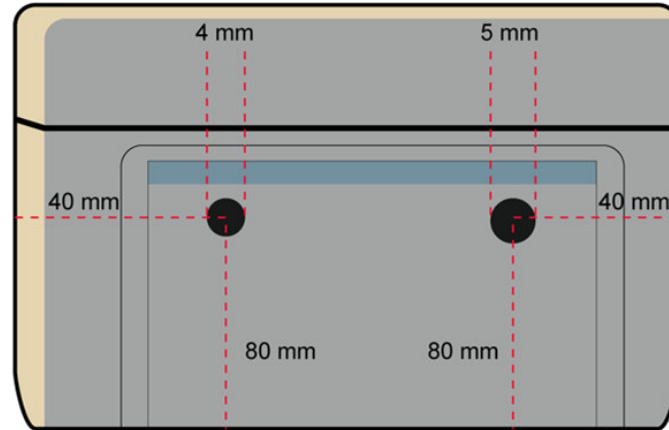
Left Lateral Face with the dimensions of the holes for the HV and GND cables
